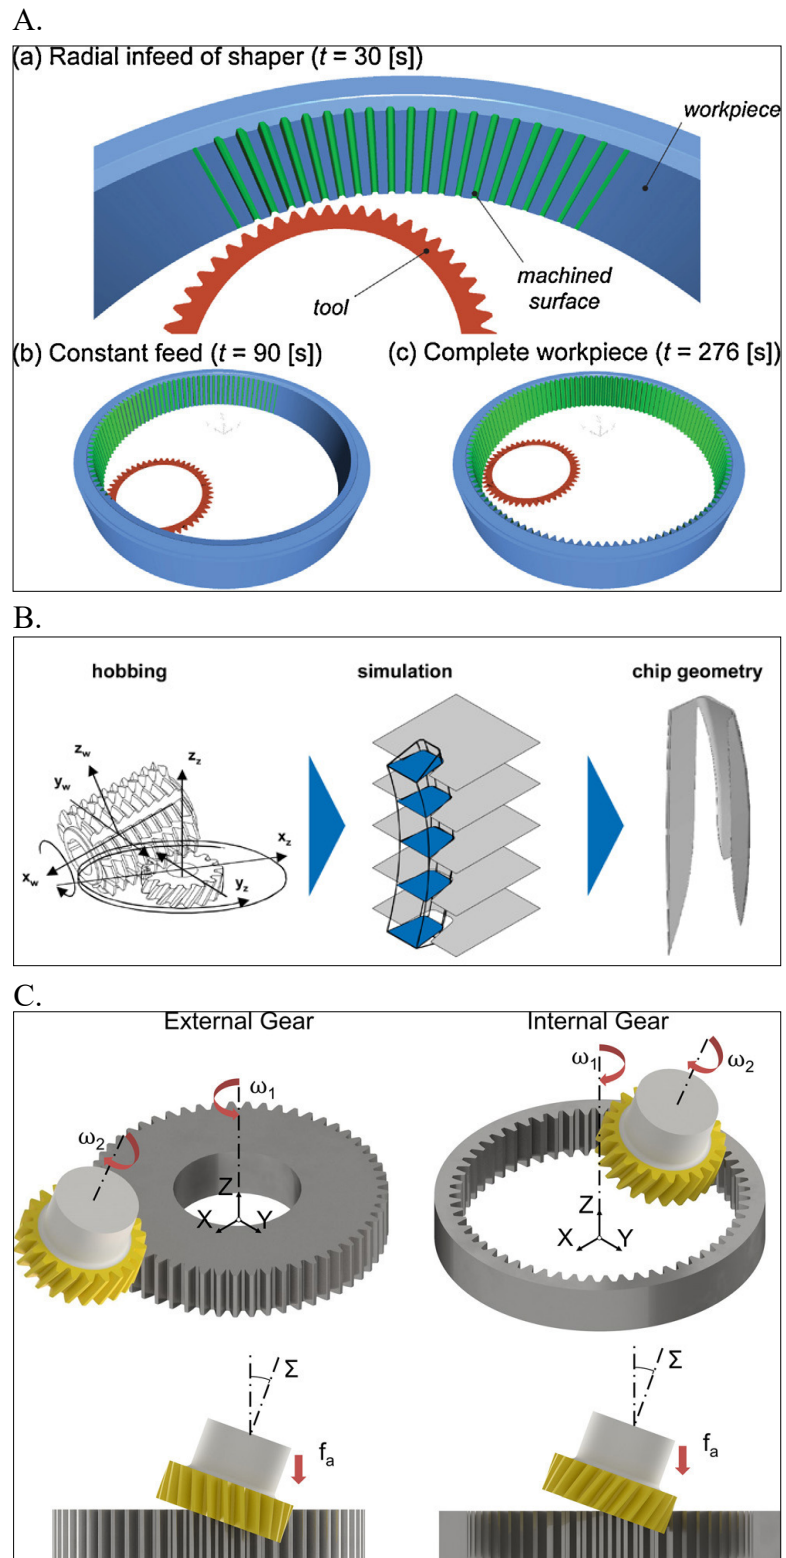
Modelling techniques for gear manufacturing, A. gear shaping by dextral-based method, B. gear hobbing by dextral-based method, C. gear skiving by solid modelling method [7, 8, 9]
